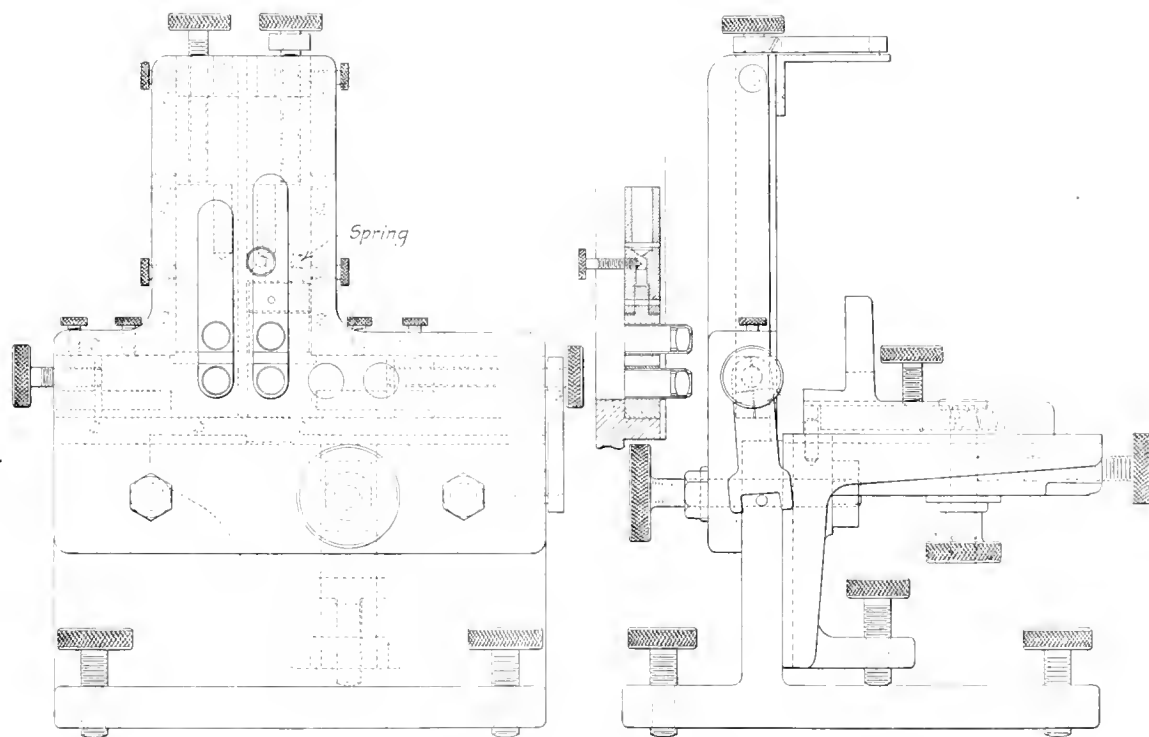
MACHINE DESIGNED FOR SMALLER RANGE OF WORK
